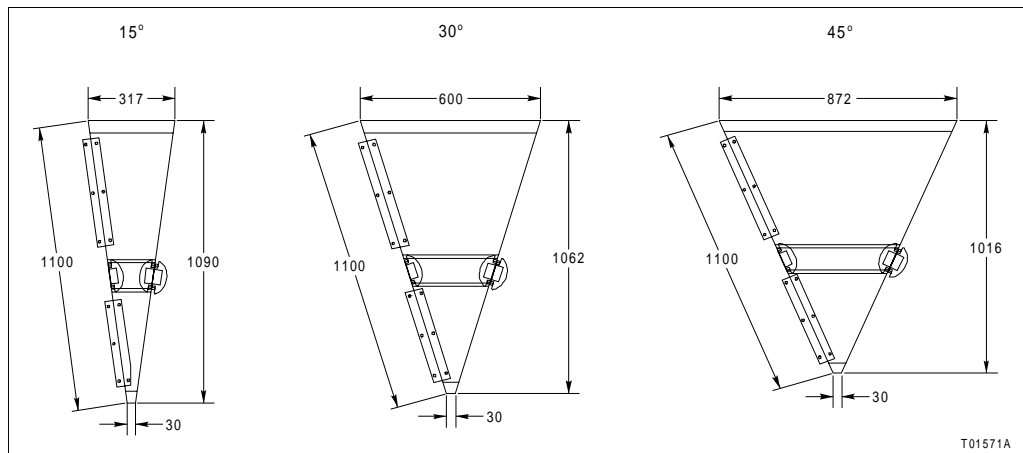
Wedge Top Views Showing Front and Rear Surfaces
